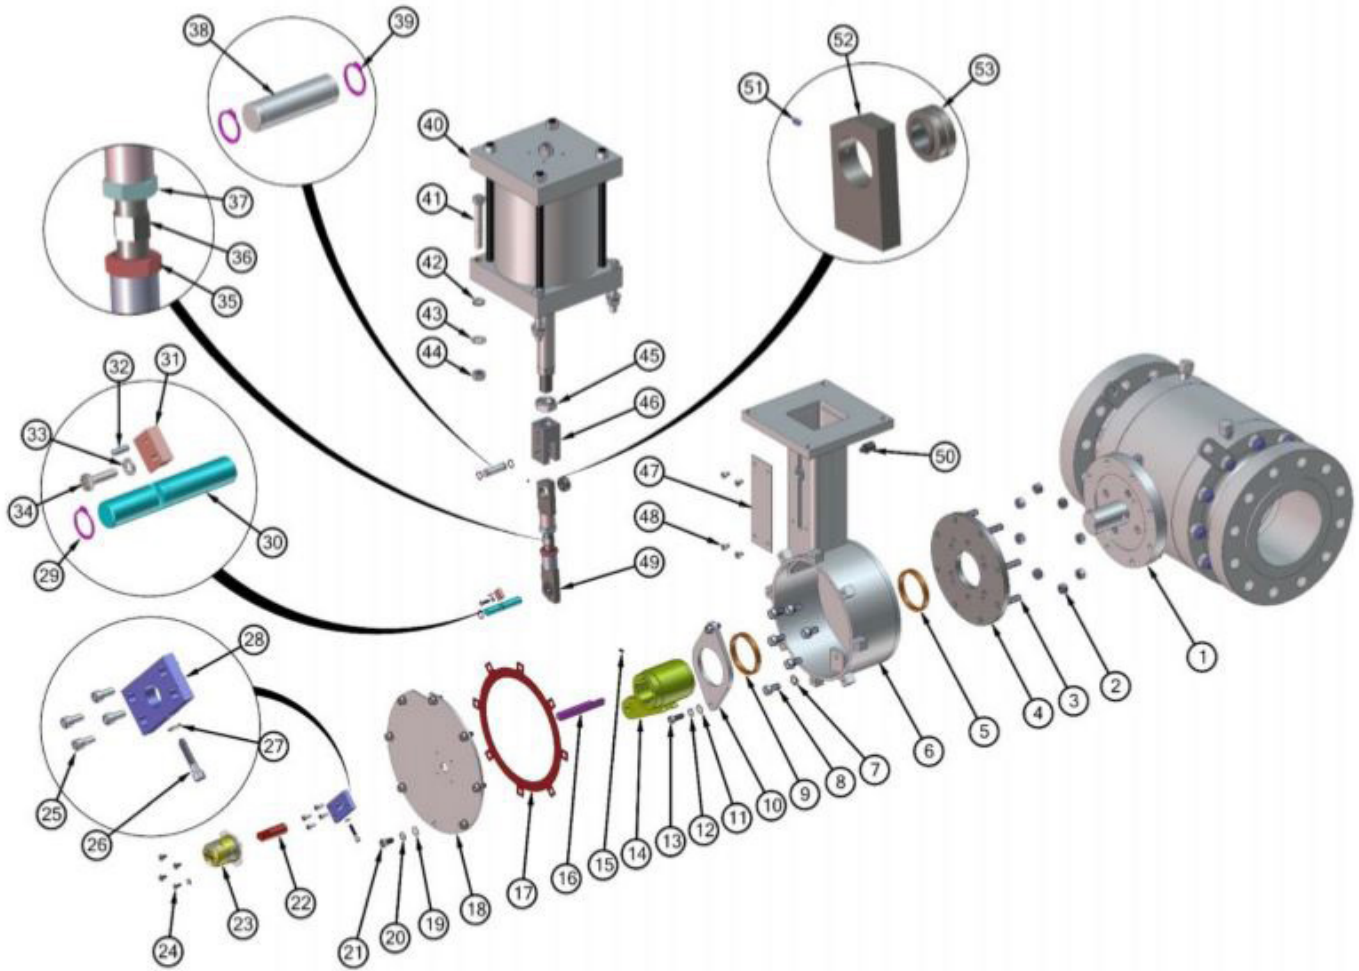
RHPA-DA ABOVE GROUND ACTUATOR WITH TAILROD– EXPLODED VIEW
